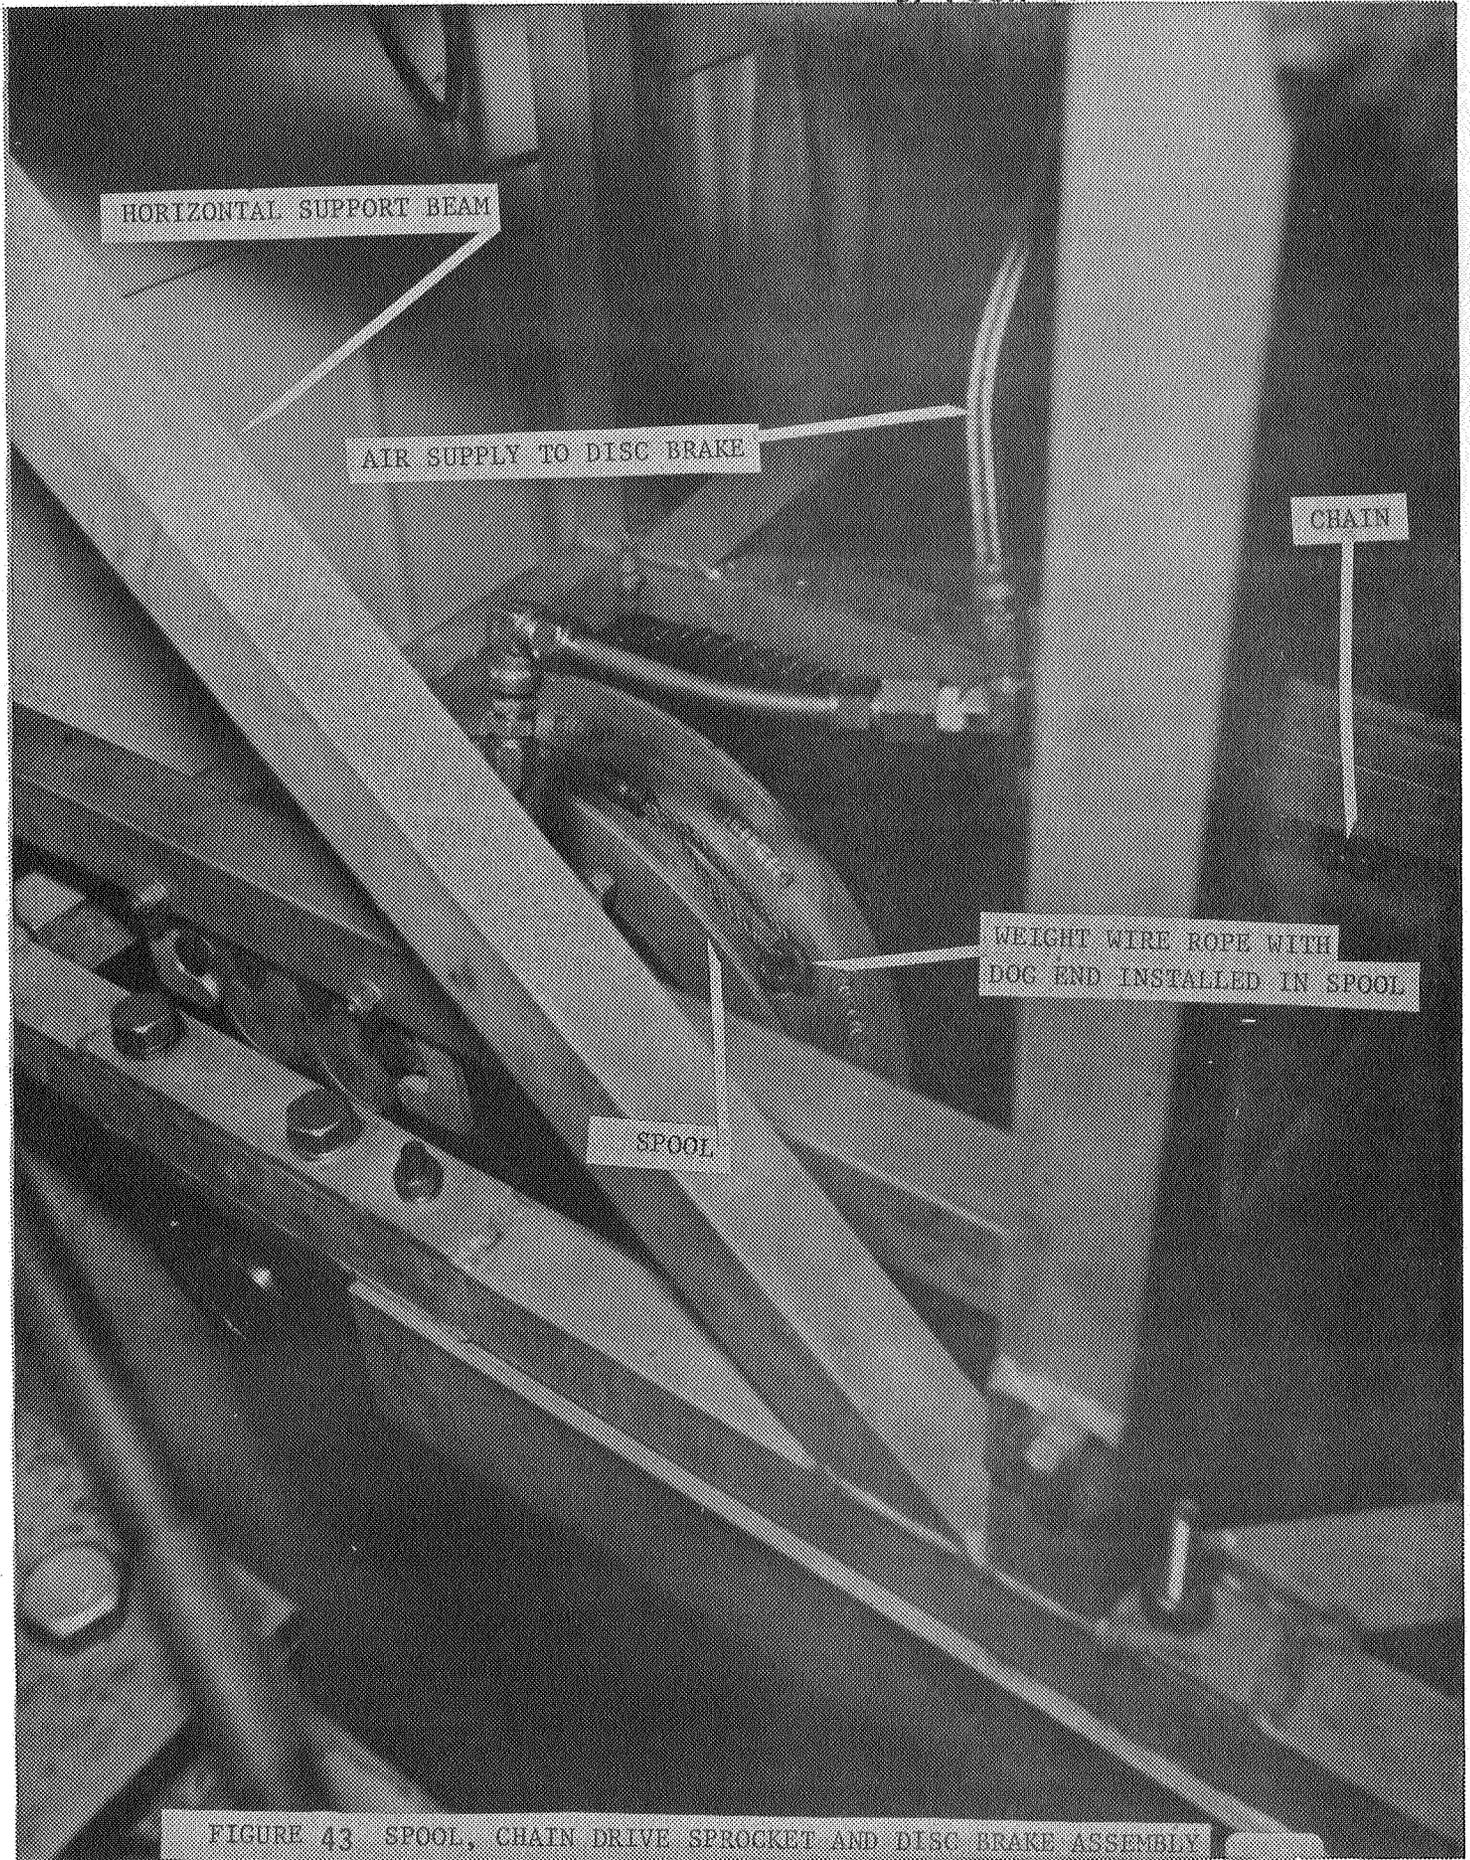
SPOOL, CHAIN DRIVE SPROCKET AND DISC BRAKE ASSEMBLY
